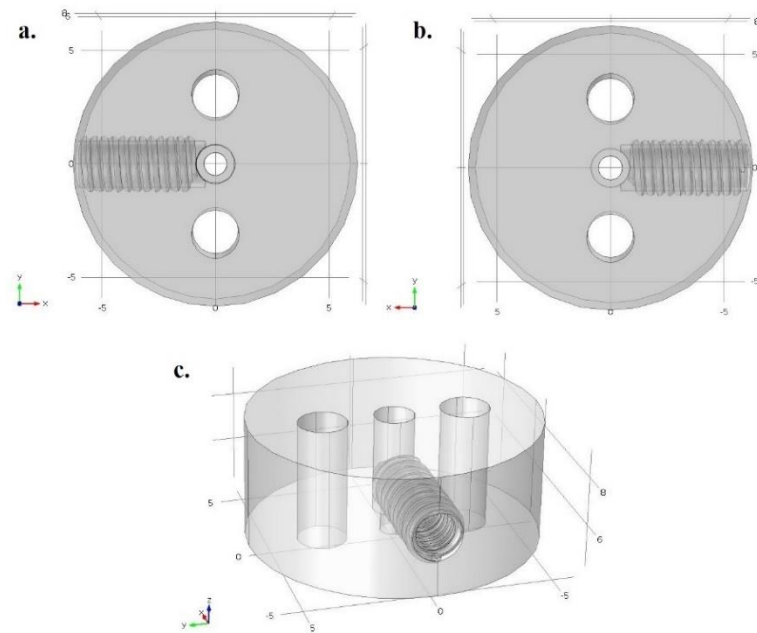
Schematic illustrations of top and bottom view of upper part of prototype 7, (a. top view, b. bottom view, c. top inclined transparent view)
